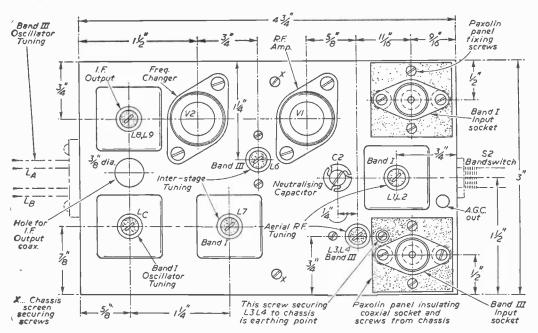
The above-chassis layout and dimensions of the tuner chassis.
